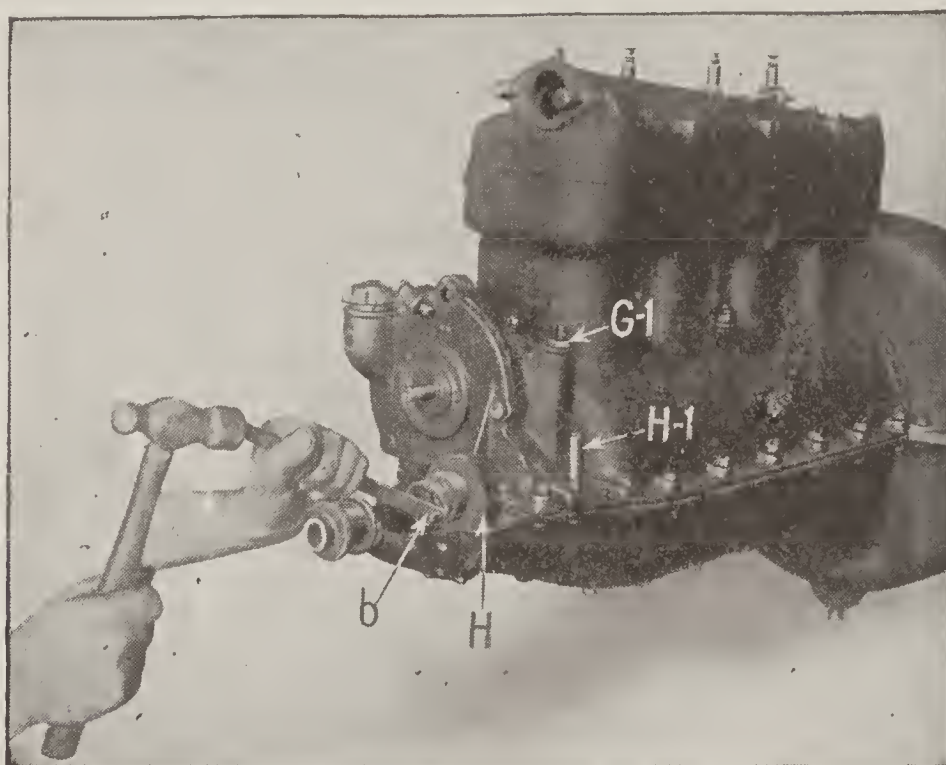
Putting on Crankshaft Sprocket Hub in Westinghouse System
